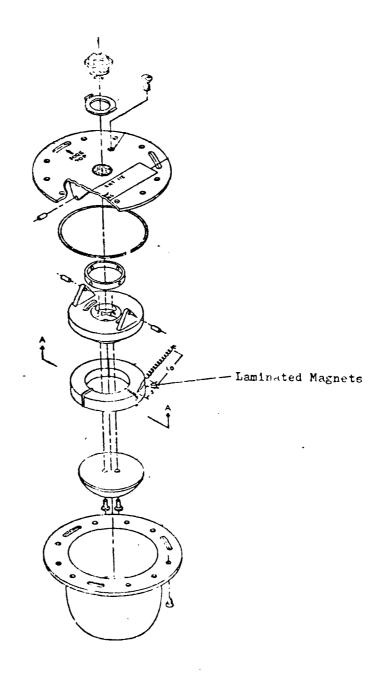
Flux Detector, Exploded View [4:5-3].
